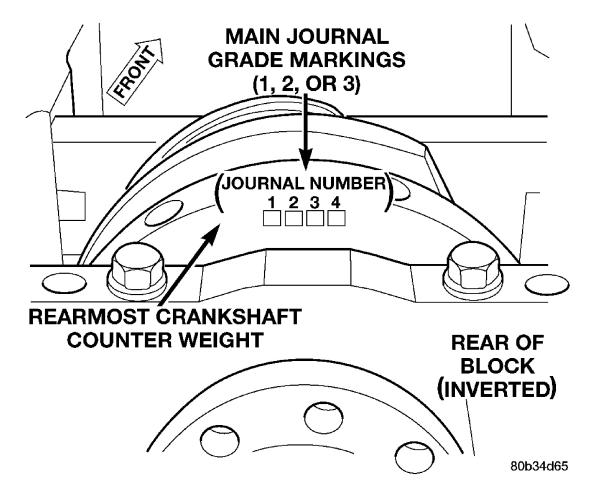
Identifying Crankshaft Main Journal Grade Marking Location Courtesy of CHRYSLER LLC
